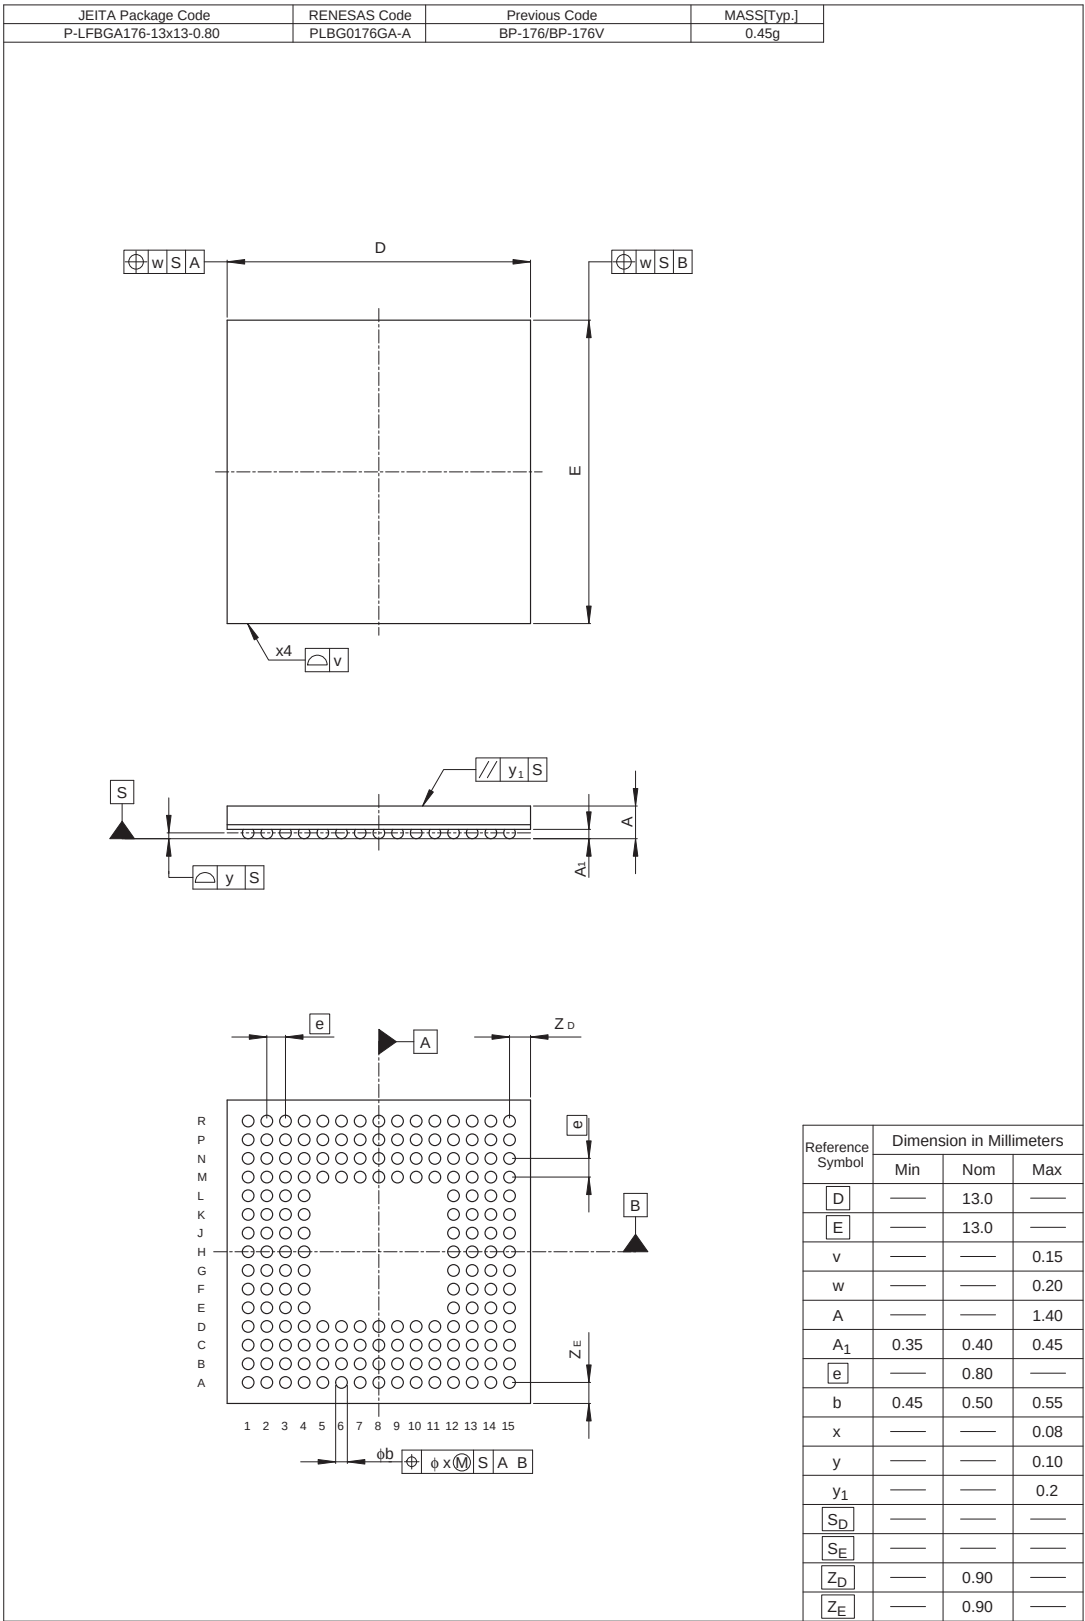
Pin LFBGA (PLBG0176GA-A) Package Dimensions
